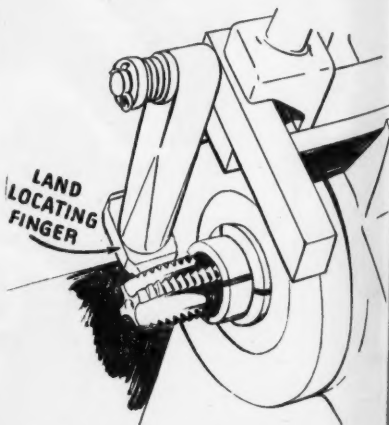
For grinding chamfered points, taps can be held in bushings as shown here.
